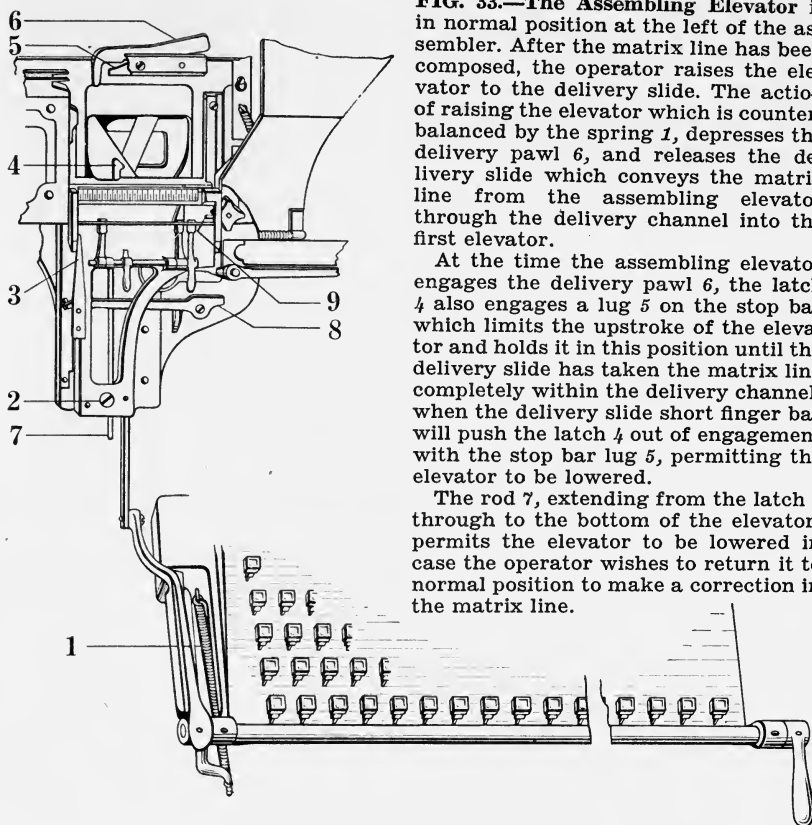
The Assembling Elevator is in normal position at the left of the assembler. After the matrix line has been composed, the operator raises the elevator to the delivery slide. The action of raising the elevator which is counter-balanced by the spring 1, depresses the delivery pawl 6, and releases the delivery slide which conveys the matrix line from the assembling elevator through the delivery channel into the first elevator.
